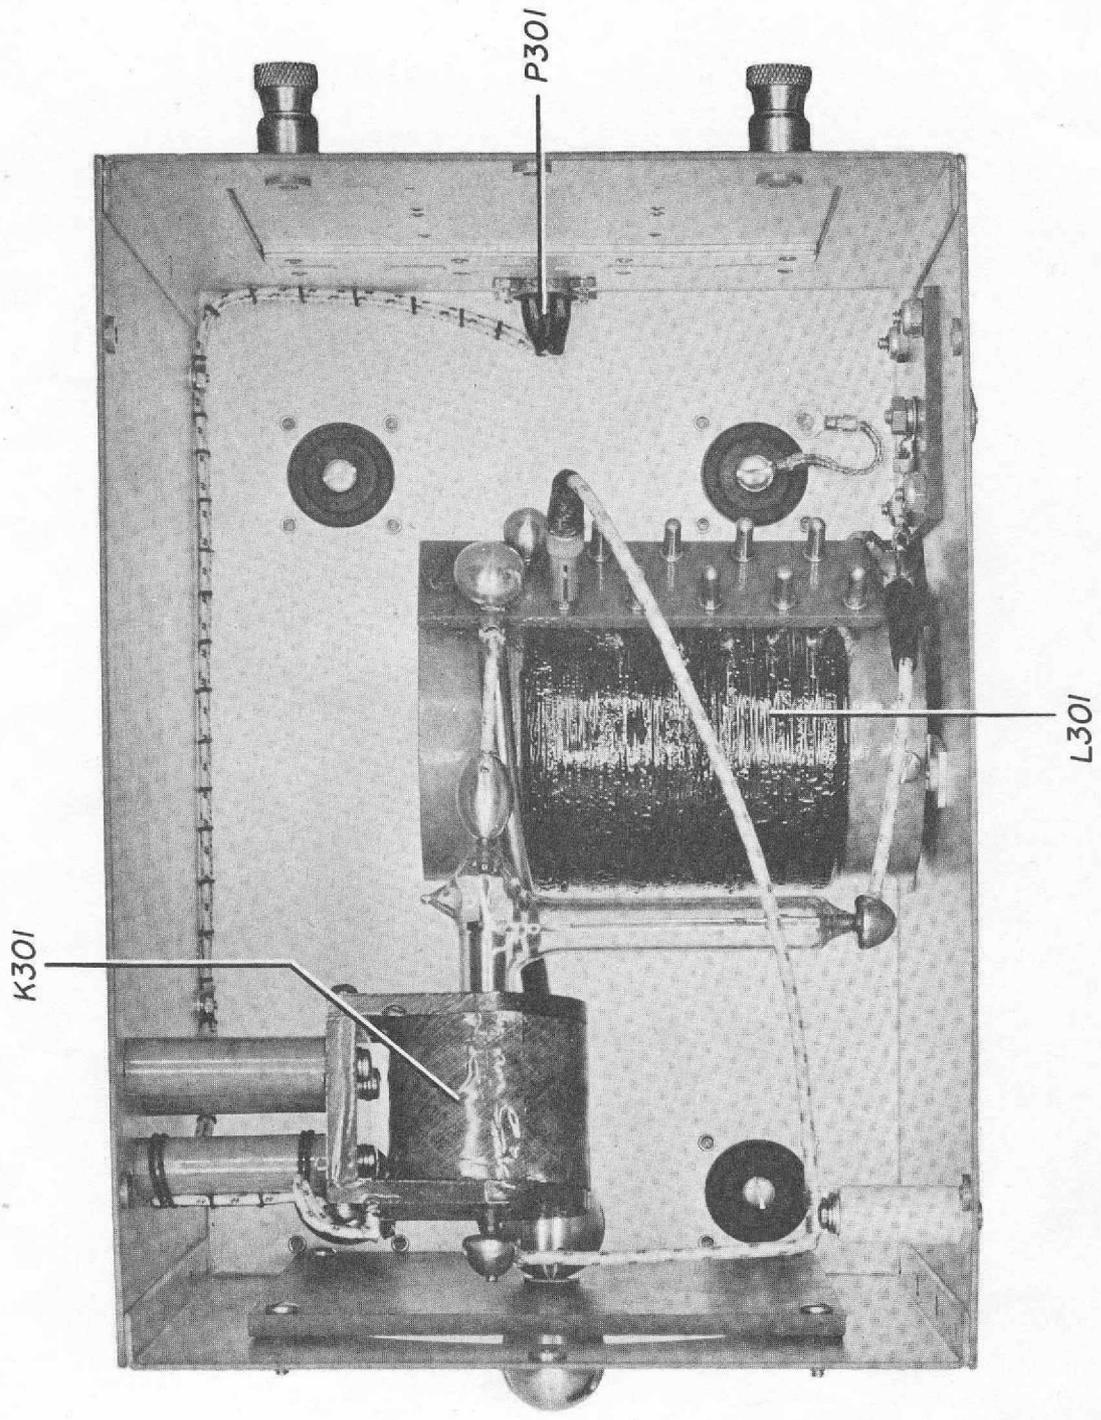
TOP VIEW TYPE MT-53B ANTENNA LOADING UNIT
